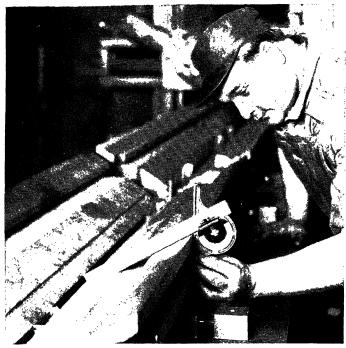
Bevel protractor. Using a bevel protractor to check angles between plane surfaces. The bevel protractor is adjustable to all angles. (*Brown and Sharpe.*)
